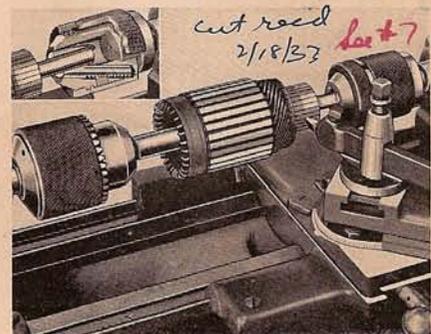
Centerless Armature Mounted in Lathe using Tailstock Adjustable Bushing.
